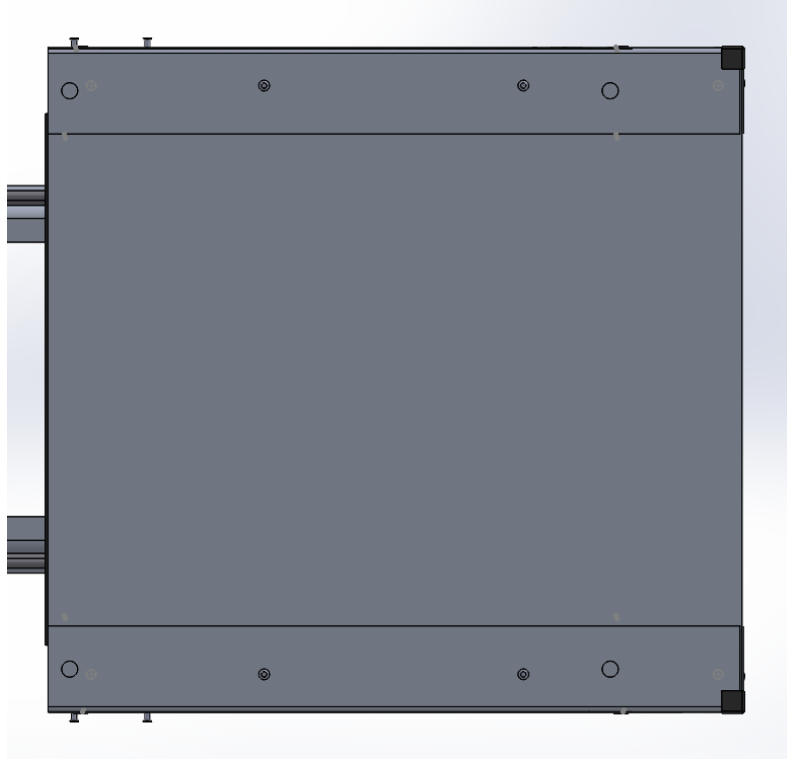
Bottom of the oven with floor plate added and fastened to bottom flanges.
